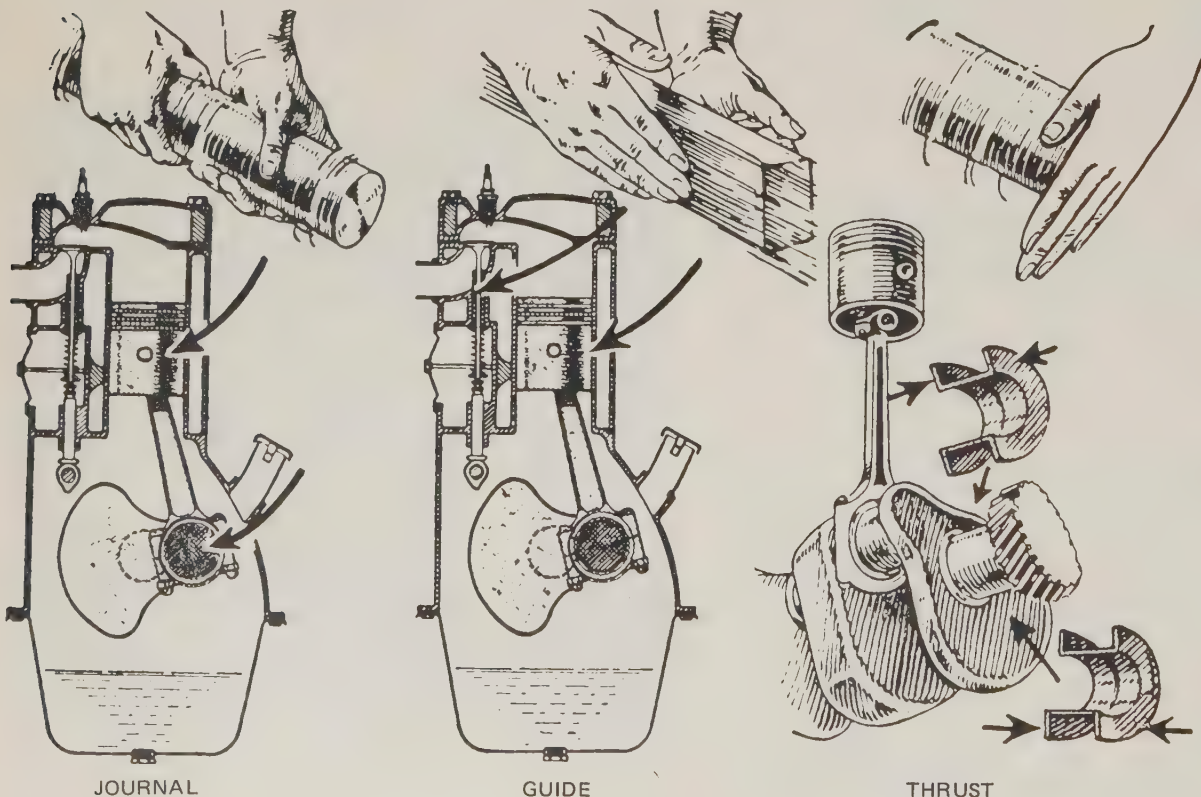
Three types of friction-bearing surfaces in an engine.
